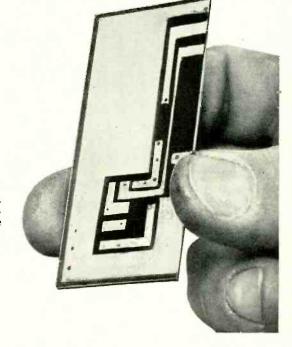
Plated circuit board - plating is copper, base is Plexiglas.
